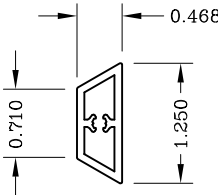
/2 Scale – For Custom Size Drawing Contact Graham
